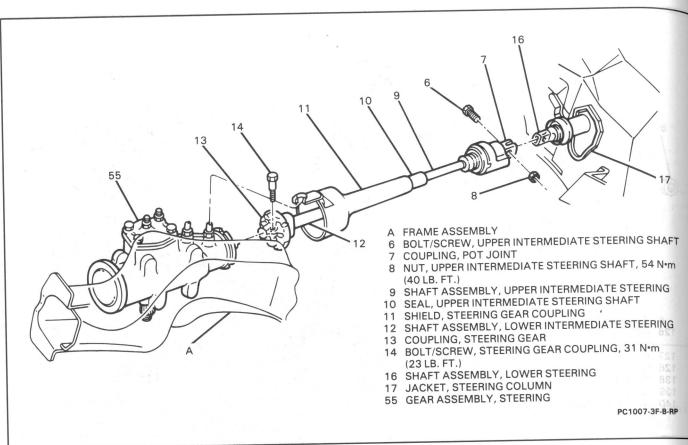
Intermediate Steering Shaft Assembly Replacement
